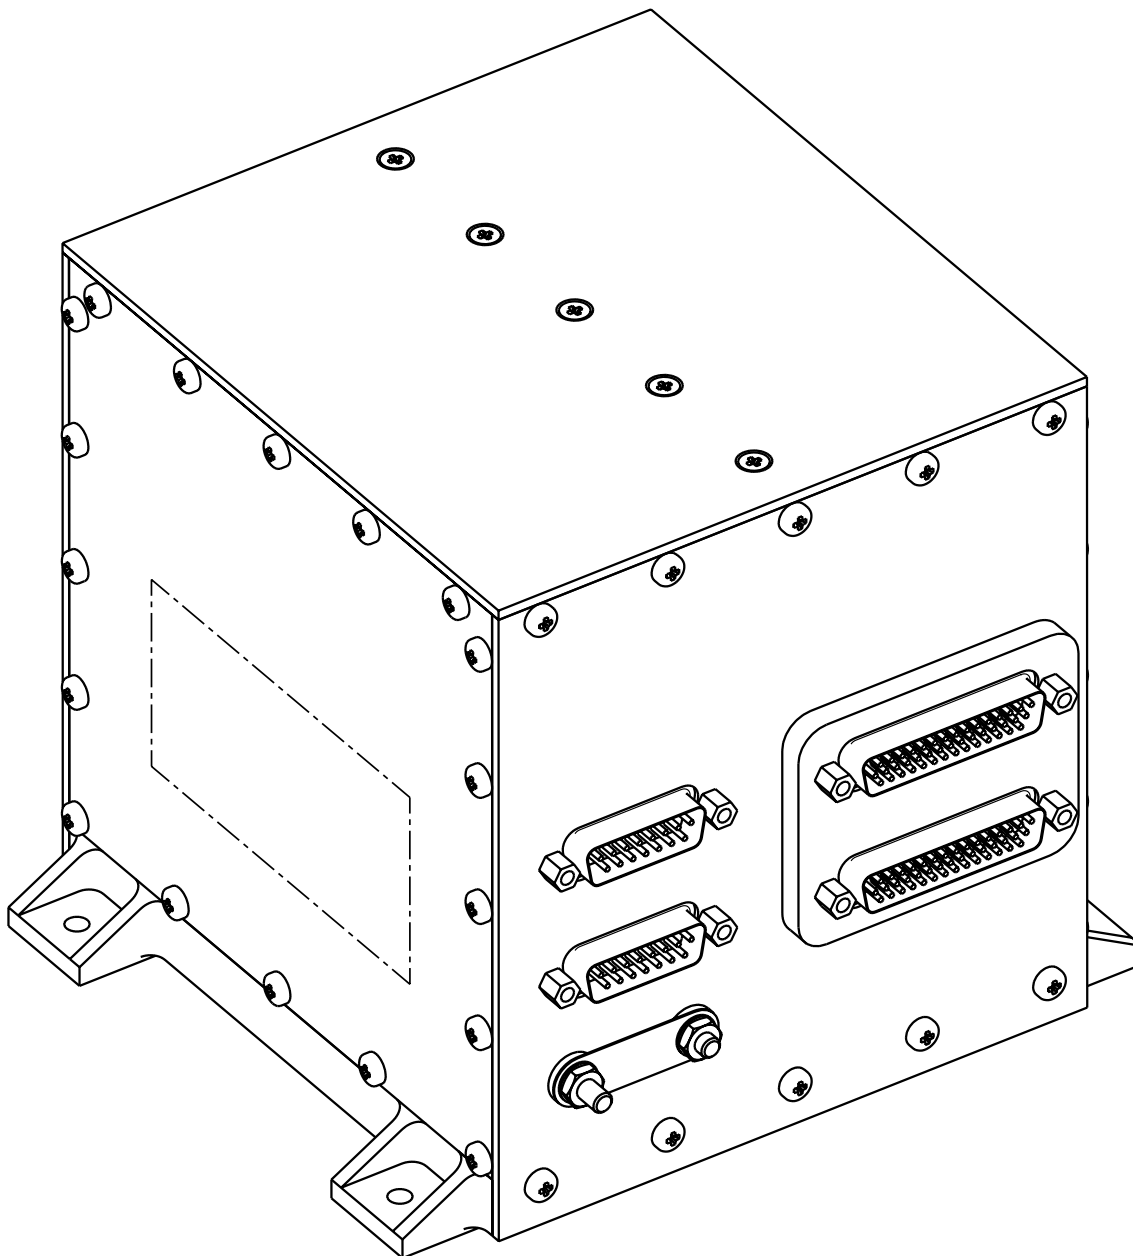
Mechanical Interface Control drawing of COPS (UoB Drawing M158-1001)
